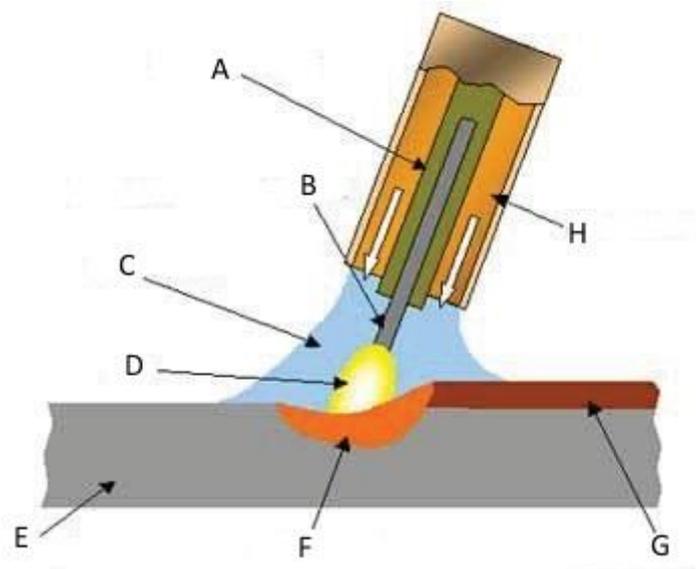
The MAG welding process. A. Contact tube, B. Consumable electrode, C. Gas Shield, D. Arc, E. Workpiece, F. Weld pool, G. Weld metal, H. Gas Nozzle. Source: TWI
